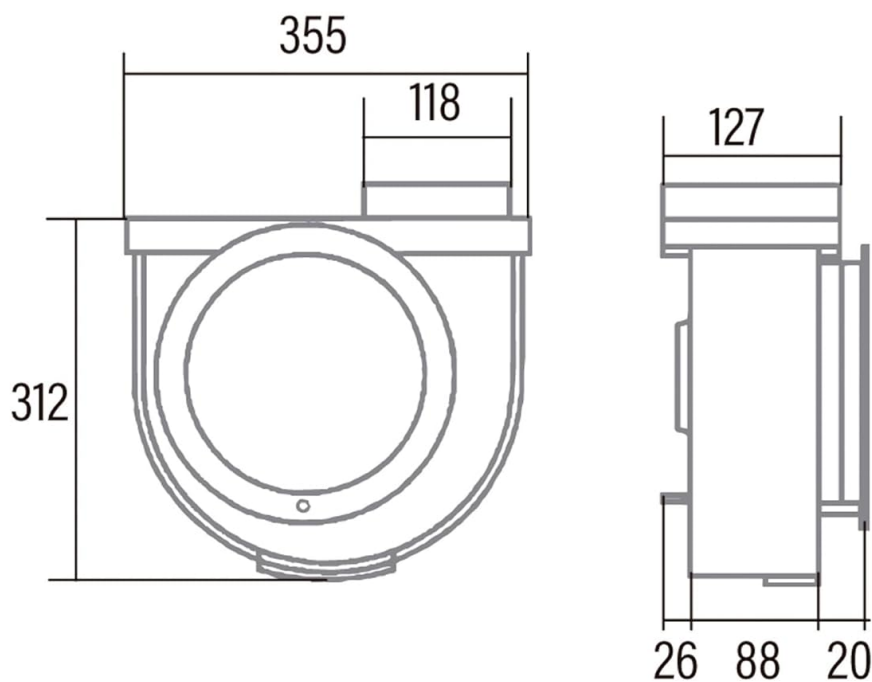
Technical drawing showing the dimensions of the CATA GS-600 Plus 2V extractor fan. The drawing indicates a width of 355mm, height of 312mm, and depth of 127mm, with specific measurements for the outlet and mounting points.
